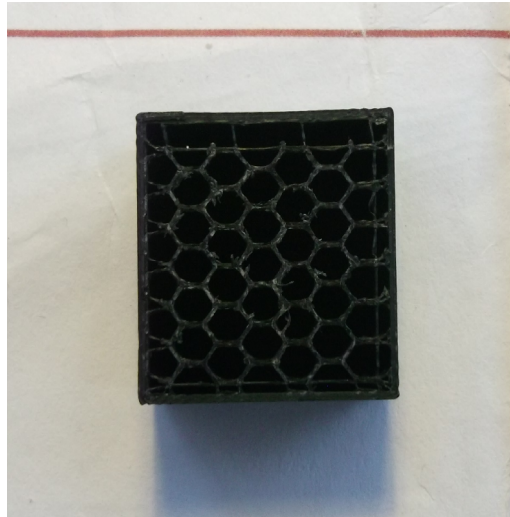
Cut-away of Test Print, Showing Hexagonal Fill Pattern
